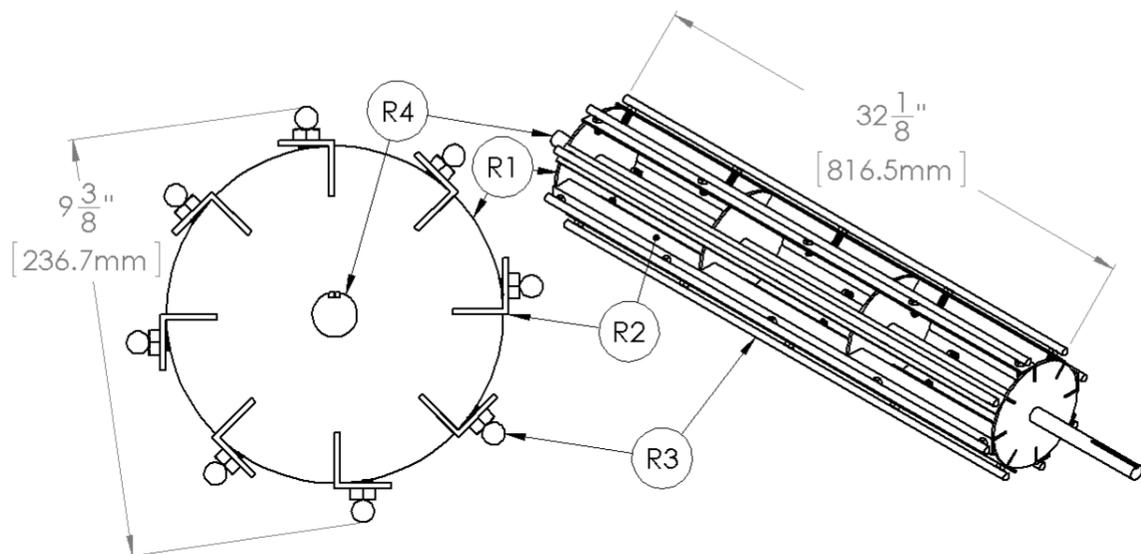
Drawings of the threshing cylinder (or drum or rotor). Source: Author.
